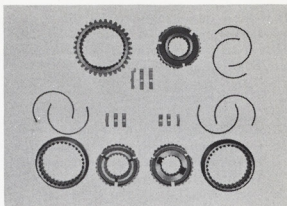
Clutch Hubs & Hub V1287 Sleeves Disassembly
